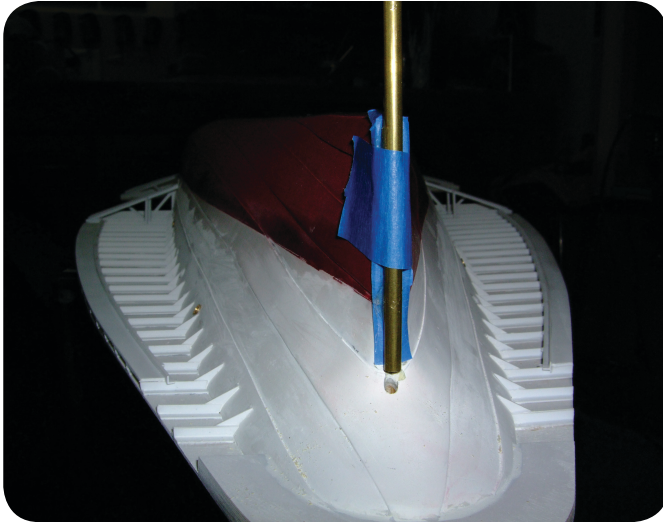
The jig is for the purpose of cutting the hole for the rudder shaft.
